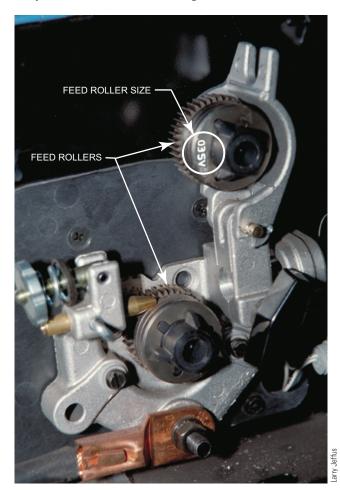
Check to be certain that the feed rollers are the correct size for the wire being used.
